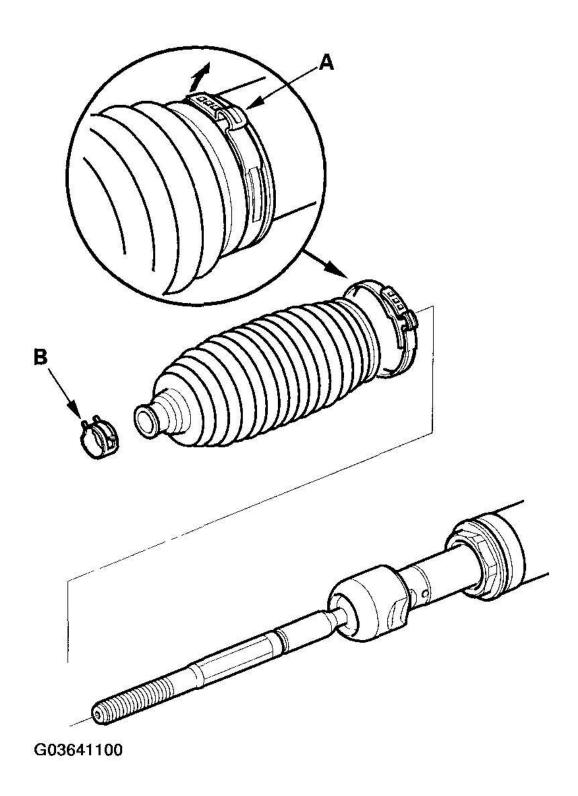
Removing Boot Bands And Tie-Rod Clips Courtesy of AMERICAN HONDA MOTOR CO., INC.
